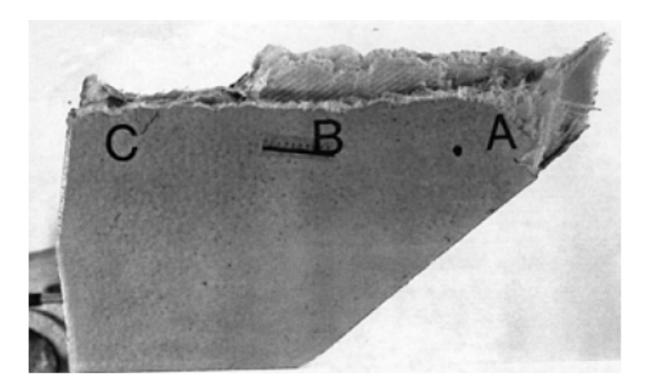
Three different failure modes exhibited on the surface of a fractured, translaminar helicopter rotor blade. A, fatigue initiation; B, translaminar bending; C, fibre crushing during final fracture (ASM, 2001)
